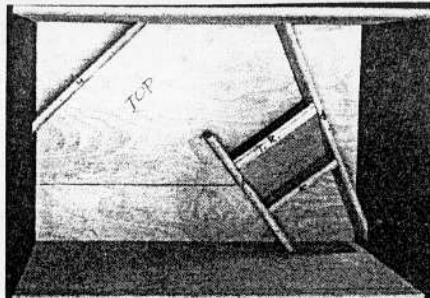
Inside view of the throat manifold with attached front and back panels.
